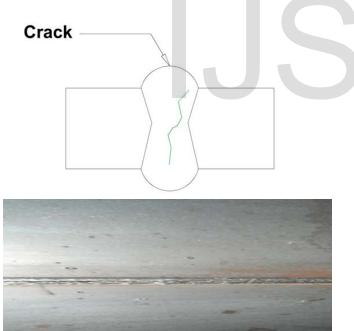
Delineative outline exemplication of longitudinal cracks in welded pipes [1],[3].
